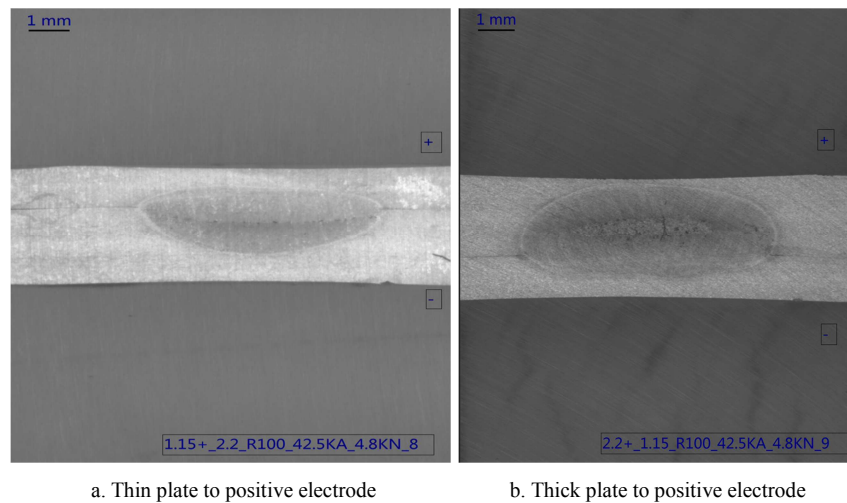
Peltier model of resistant spot welding for Aluminum alloy.
